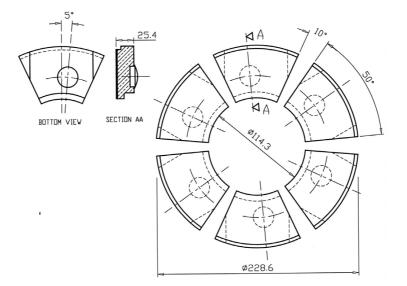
Thrust bearing with 6 shoes 60% offset pivot.
